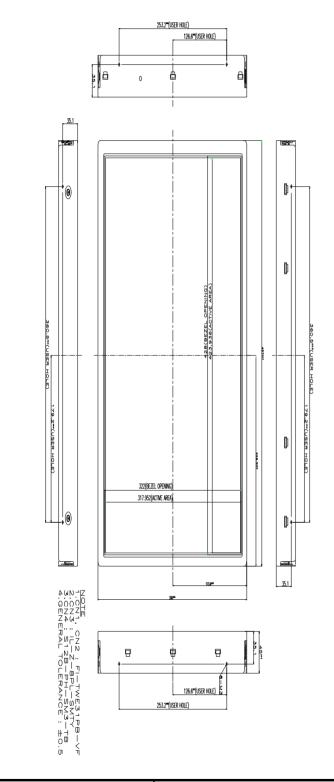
TFT-LCD Module Outline dimensions (Front view)
